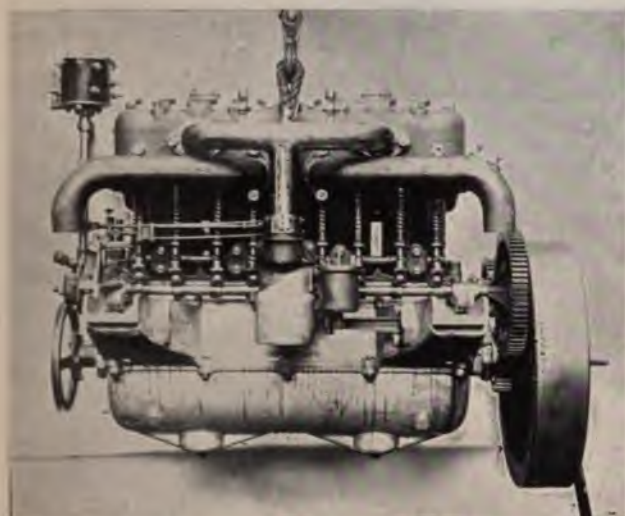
PETROL ENGINE. (The Daimler Motor Co., Ltd.)
